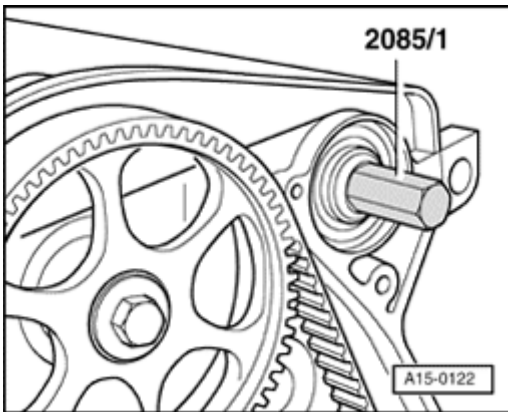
Adapter 2085/1 Threaded In Camshaft
